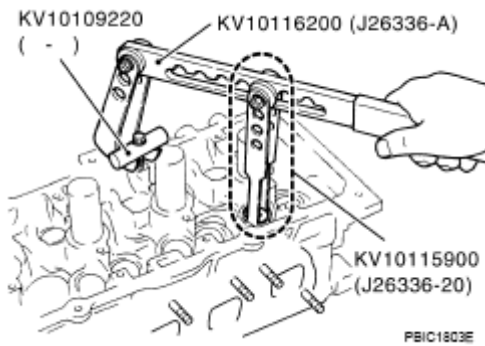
Compressing Valve Spring With Valve Spring Compressor
